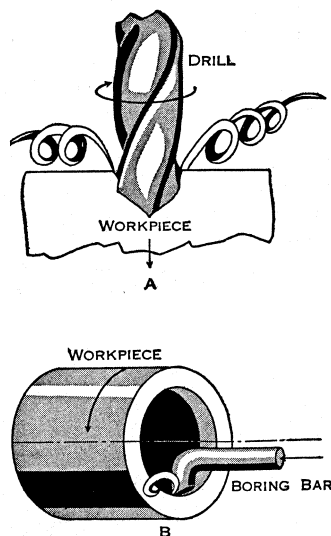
BASIC MACHINE-TOOL OPERATIONS: (A) DRILLING AND (B) BORING
